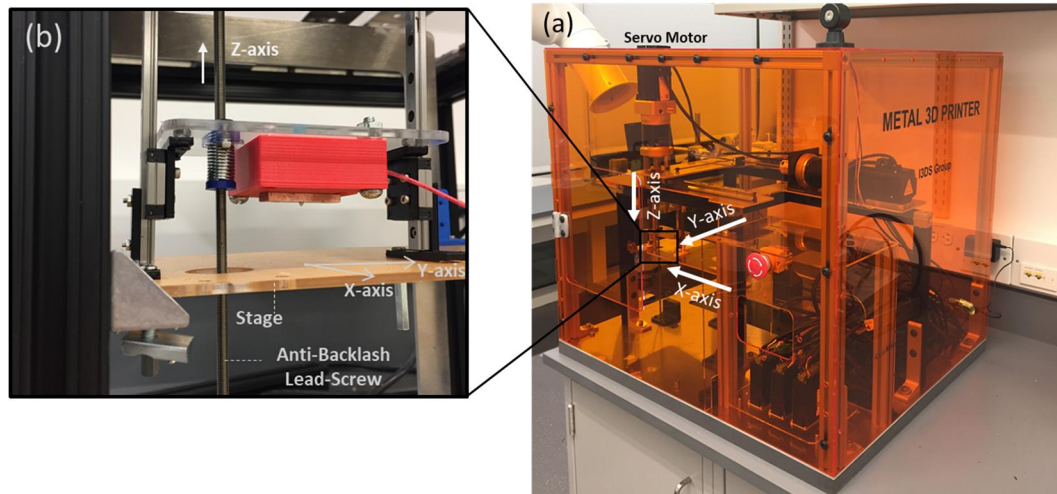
(a) In-house developed 3D Printer. (b) Printer stage and the nozzle tip.
